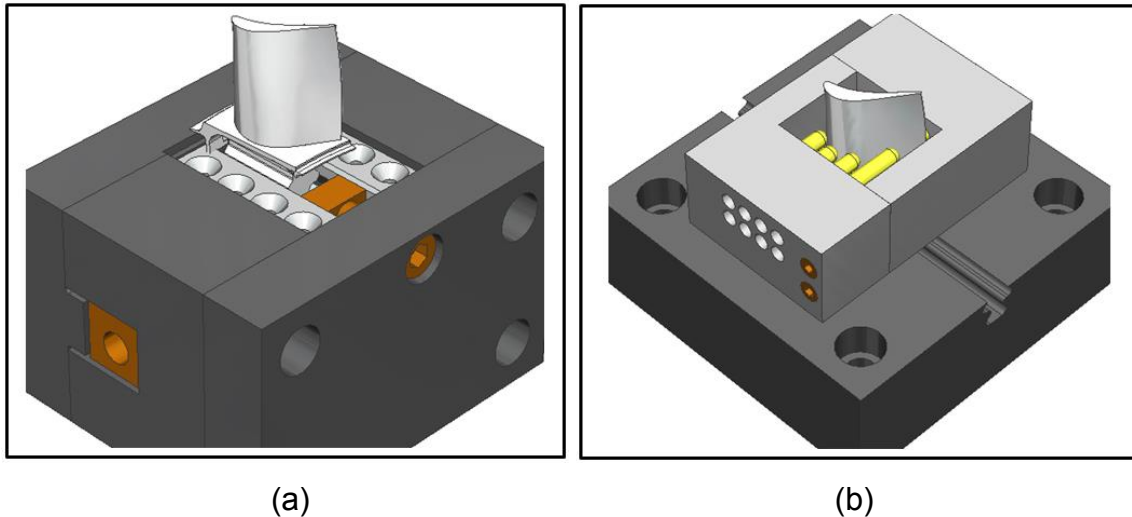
Blade fixture concept holding dovetail section (a), adaptive blade fixture concept with adjustable pins (b).
